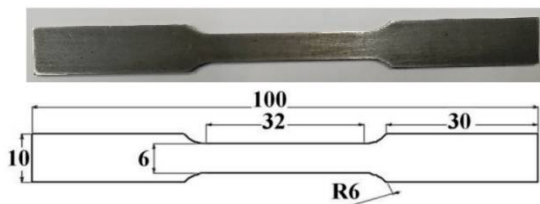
Dimensions of tensile test specimens according to ASTM E8M-99 standard in mm.
